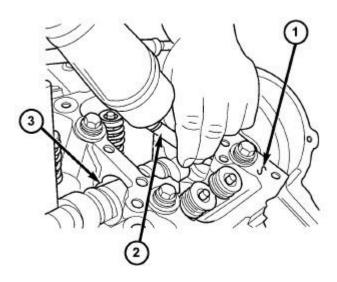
Removing Camshaft Seal - Right Cylinder Head
